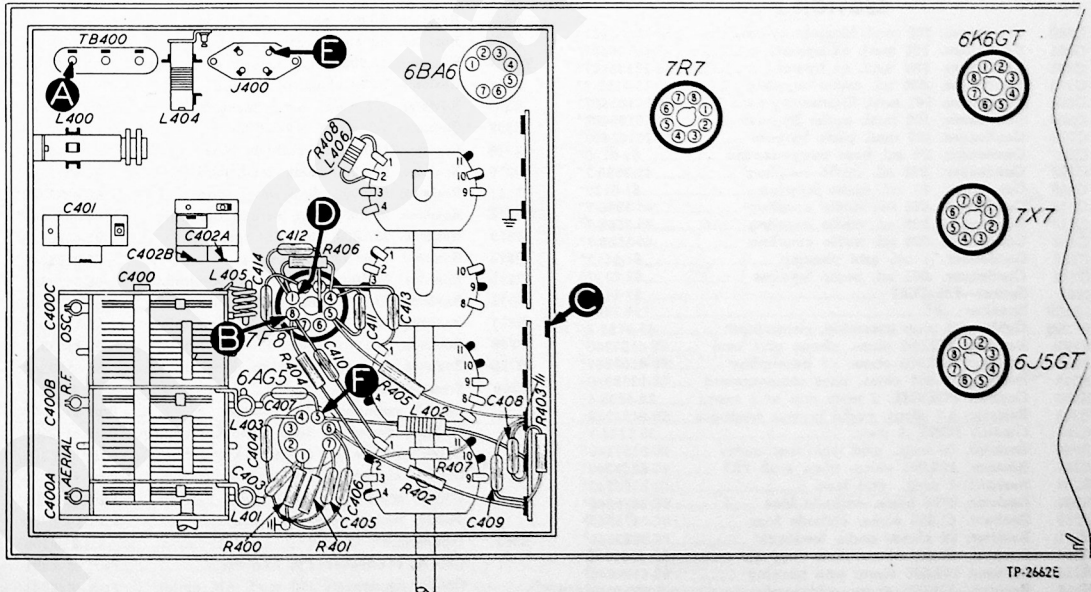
BOTTOM VIEW, SHOWING SECTION 4 TEST POINTS.
